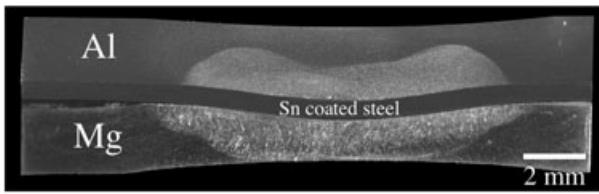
Typical cross section of Mg/Al dissimilar spot weld with Sn-coated steel interlayer at 36 kA welding current.
